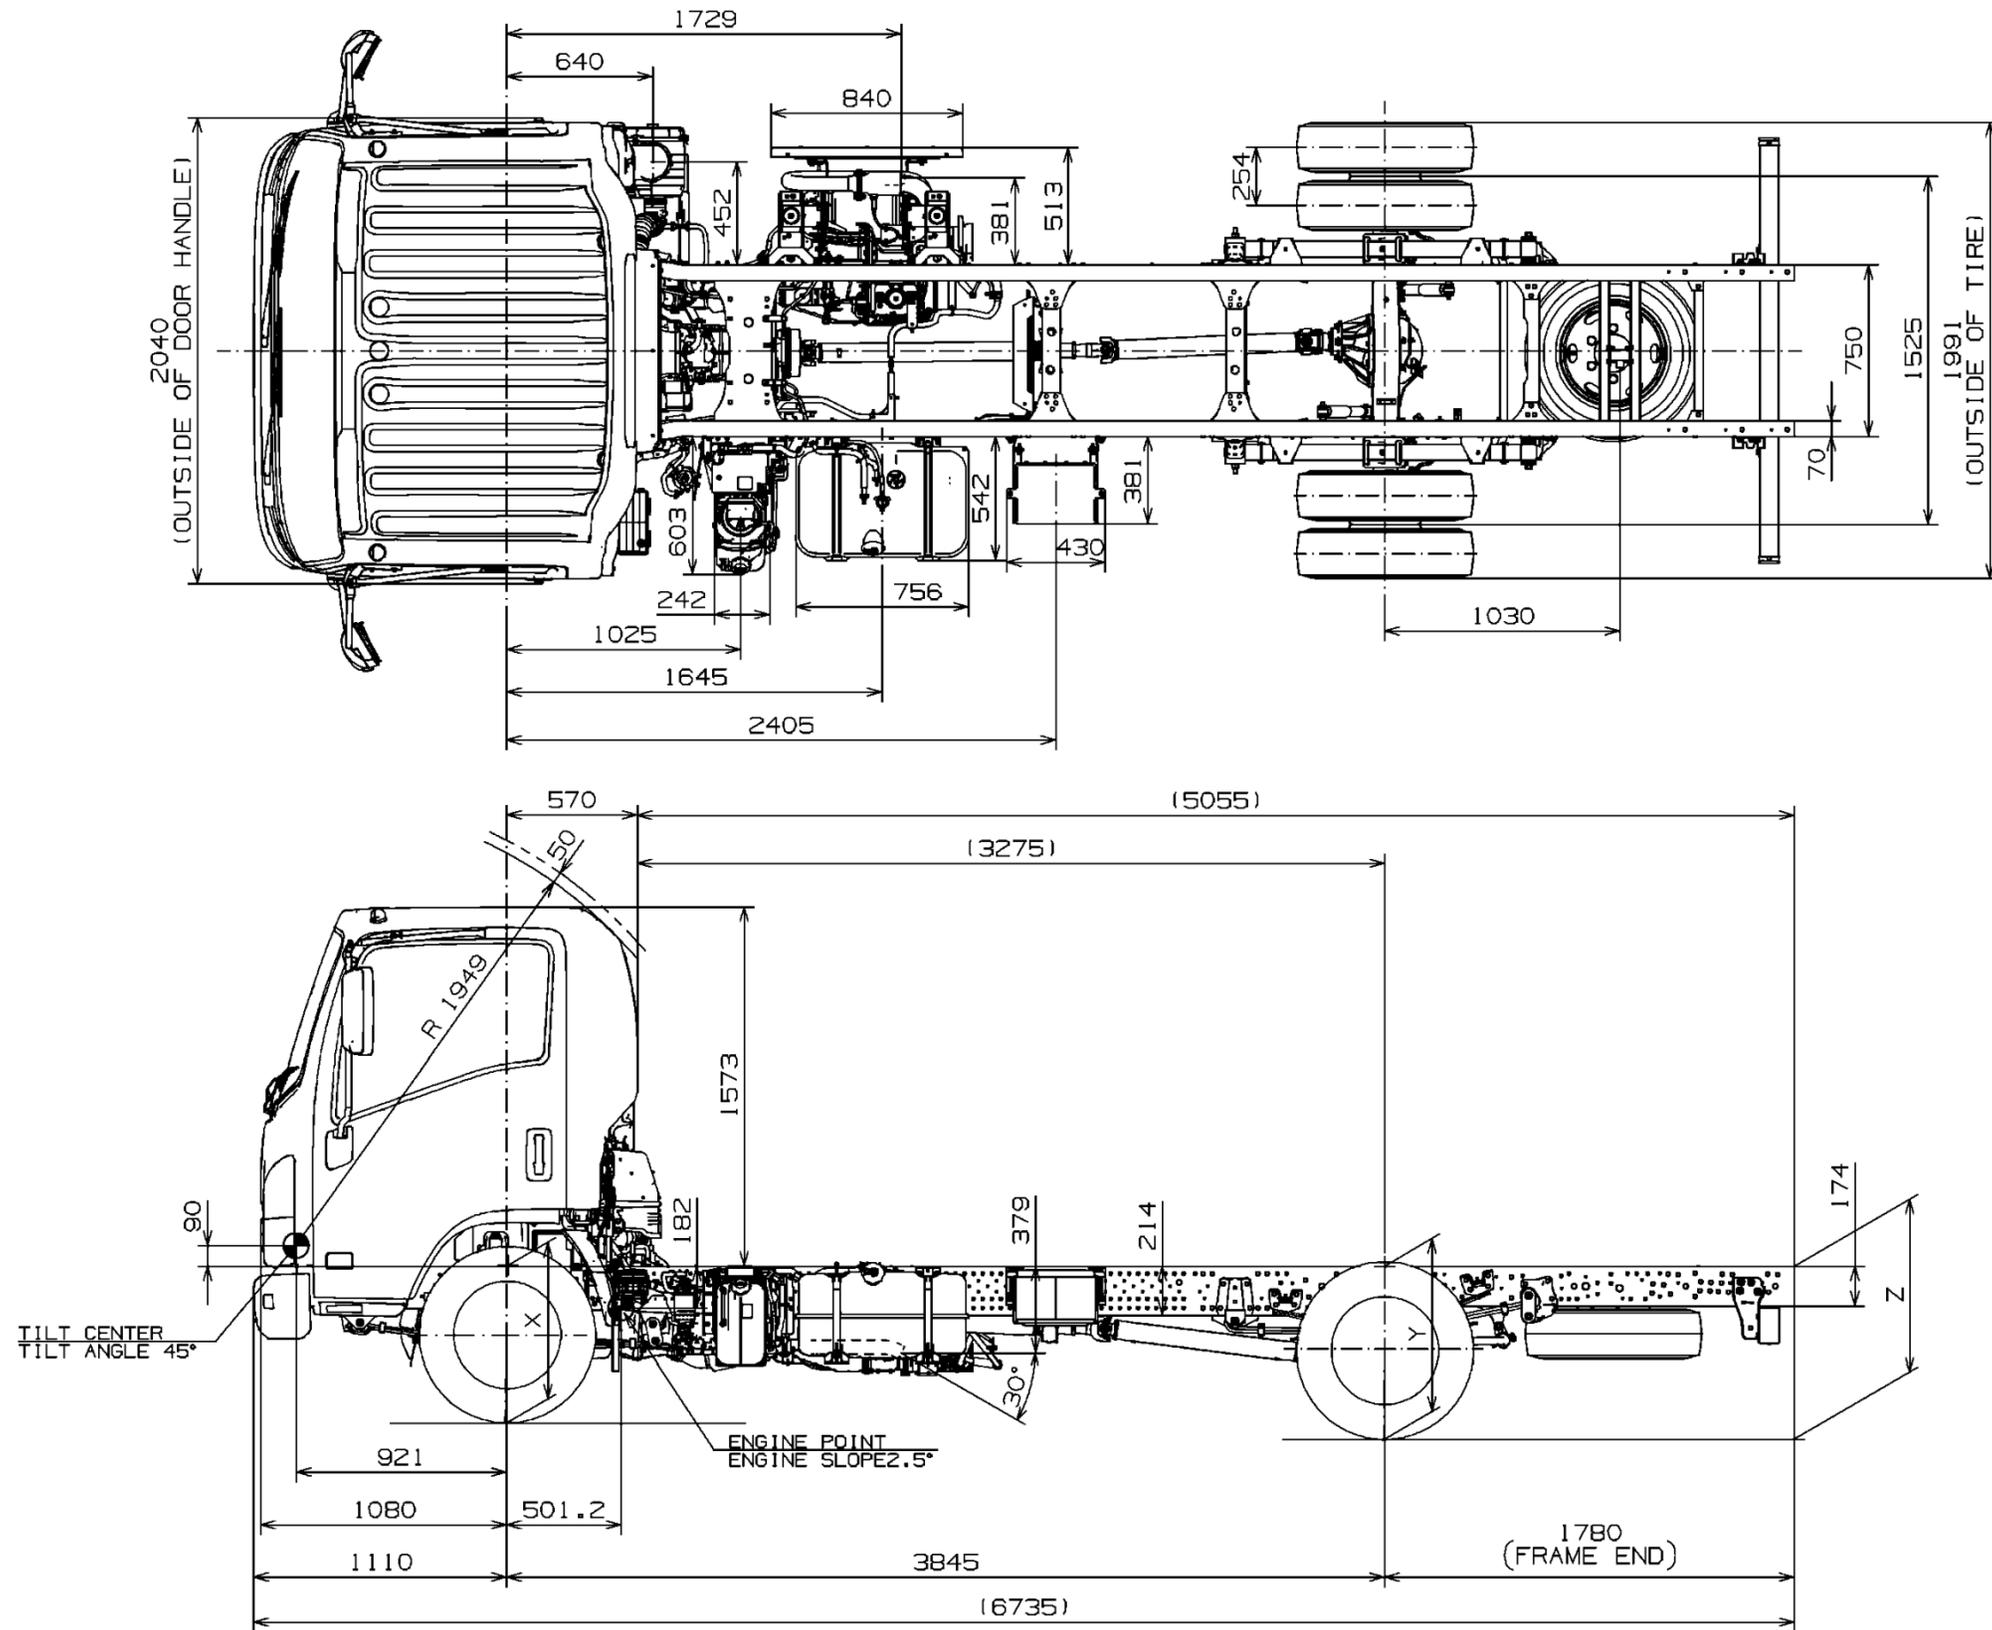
Cab Chassis Drawing NPR85L/U-KL5VAYE
